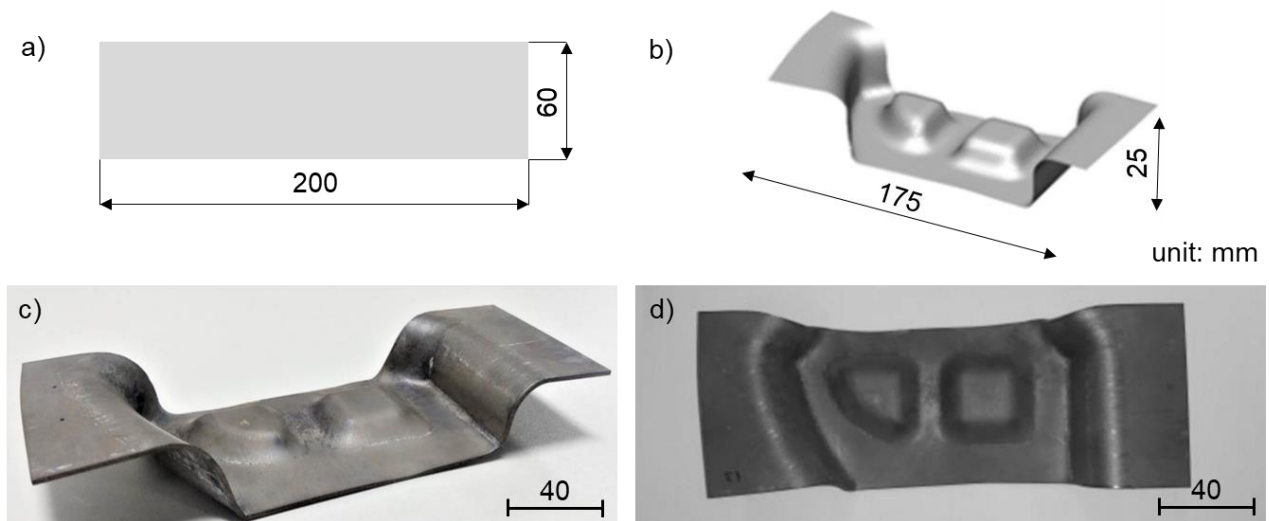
Initial sheet metal blank dimensions (a); geometry of the wing stiffener component (b); the side (c) and the top (d) view of FAST formed wing stiffener.
